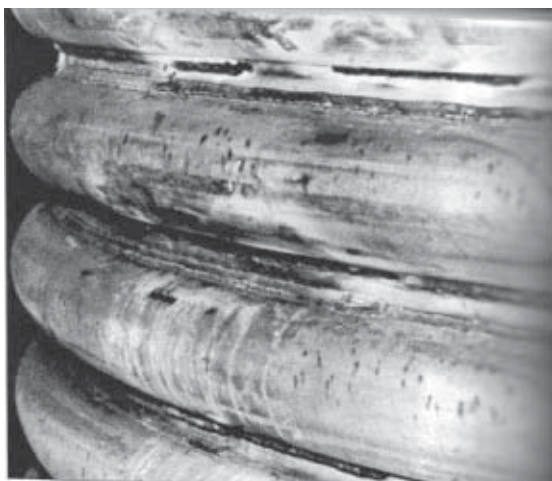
An all-position, stainless steel, flux cored welding wire was used to repair the welds that attach half-pipes to the exterior of an aspirin batch tank. (From the article “Aspirin-Makers’ Headache Gets Fast Relief from Stainless Steel Flux Cored Electrode” in the June 1988 Welding Journal.)
